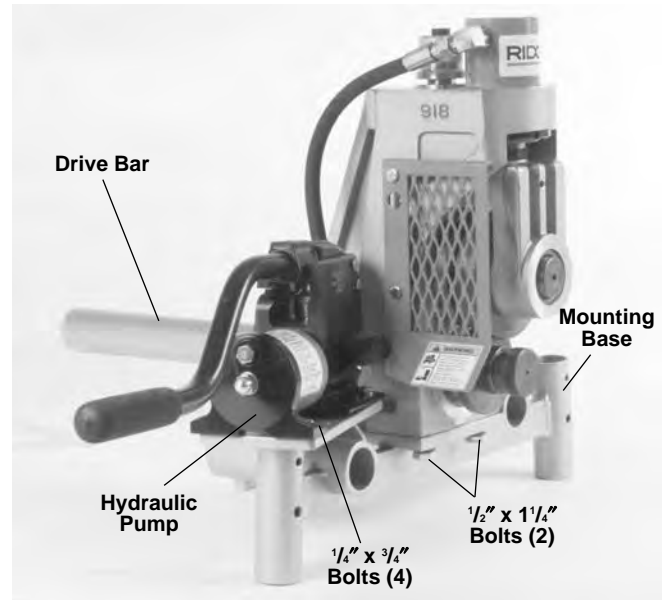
918 Heavy Duty Roll Groover on 1822 Mounting Base
